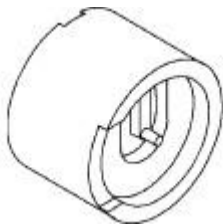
GAUGE, CHAIN TENSIONER - 8186
